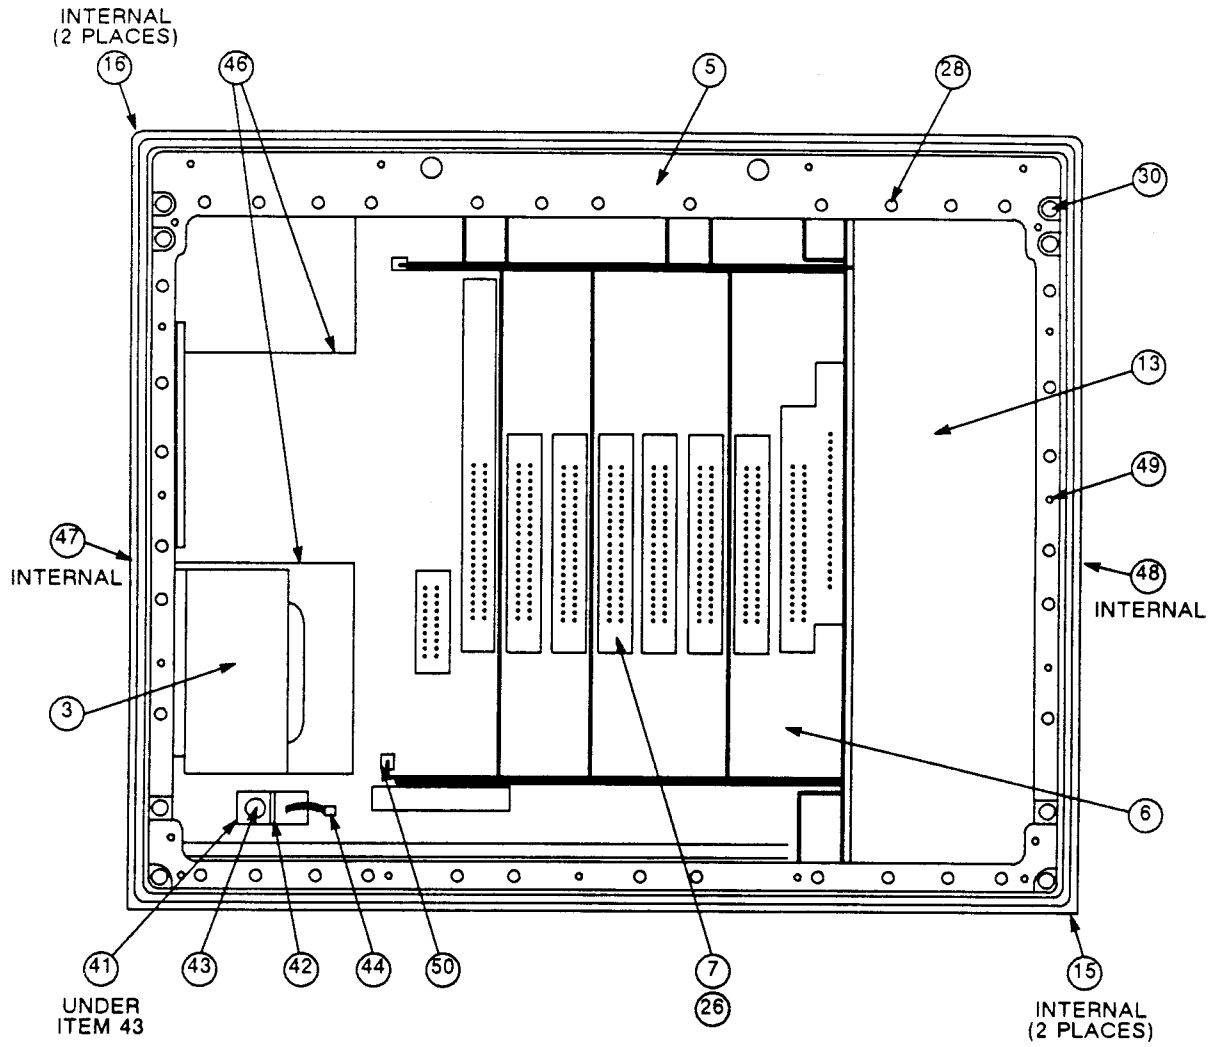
Chassis Assembly (A1) Replaceable Parts.
